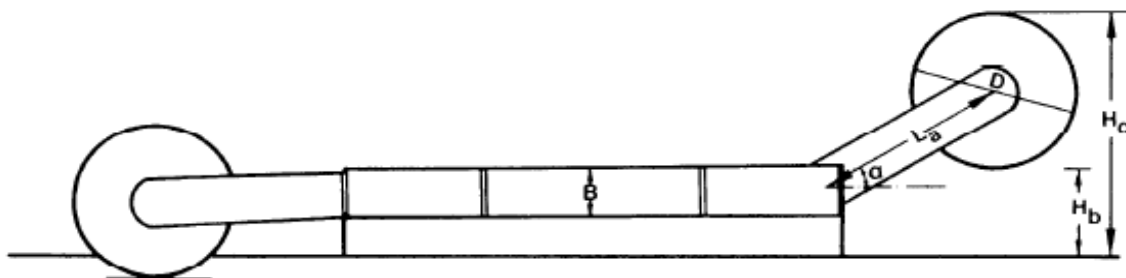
Components for determining shearer dimensions and mining height.
